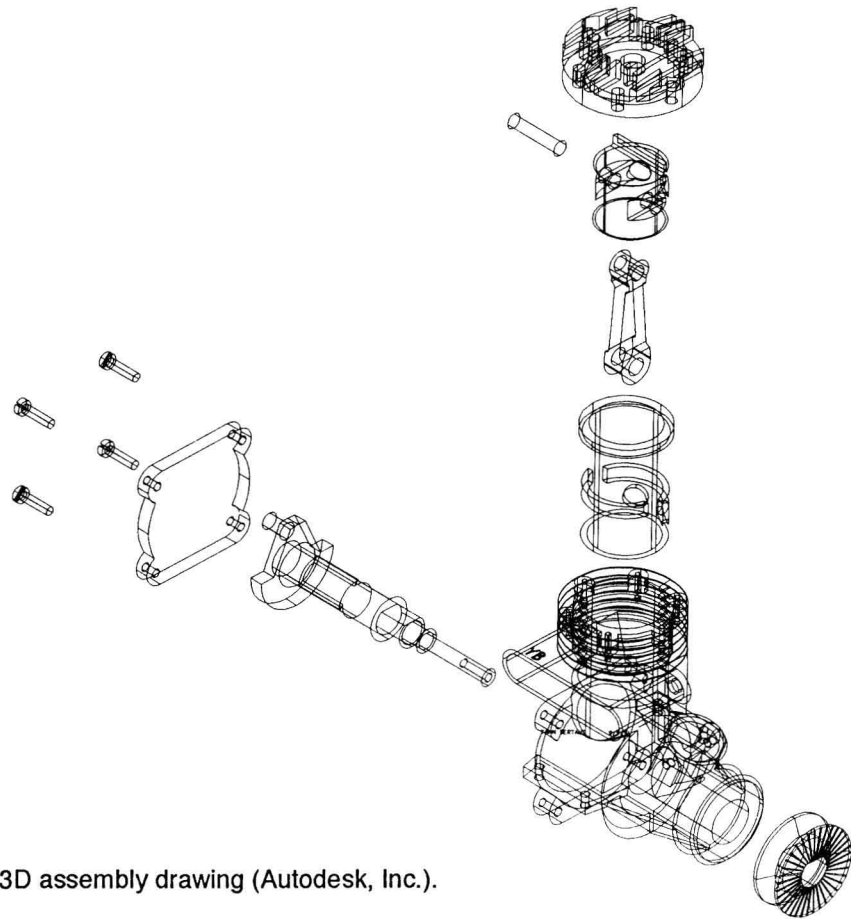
3D assembly drawing (Autodesk, Inc.).
